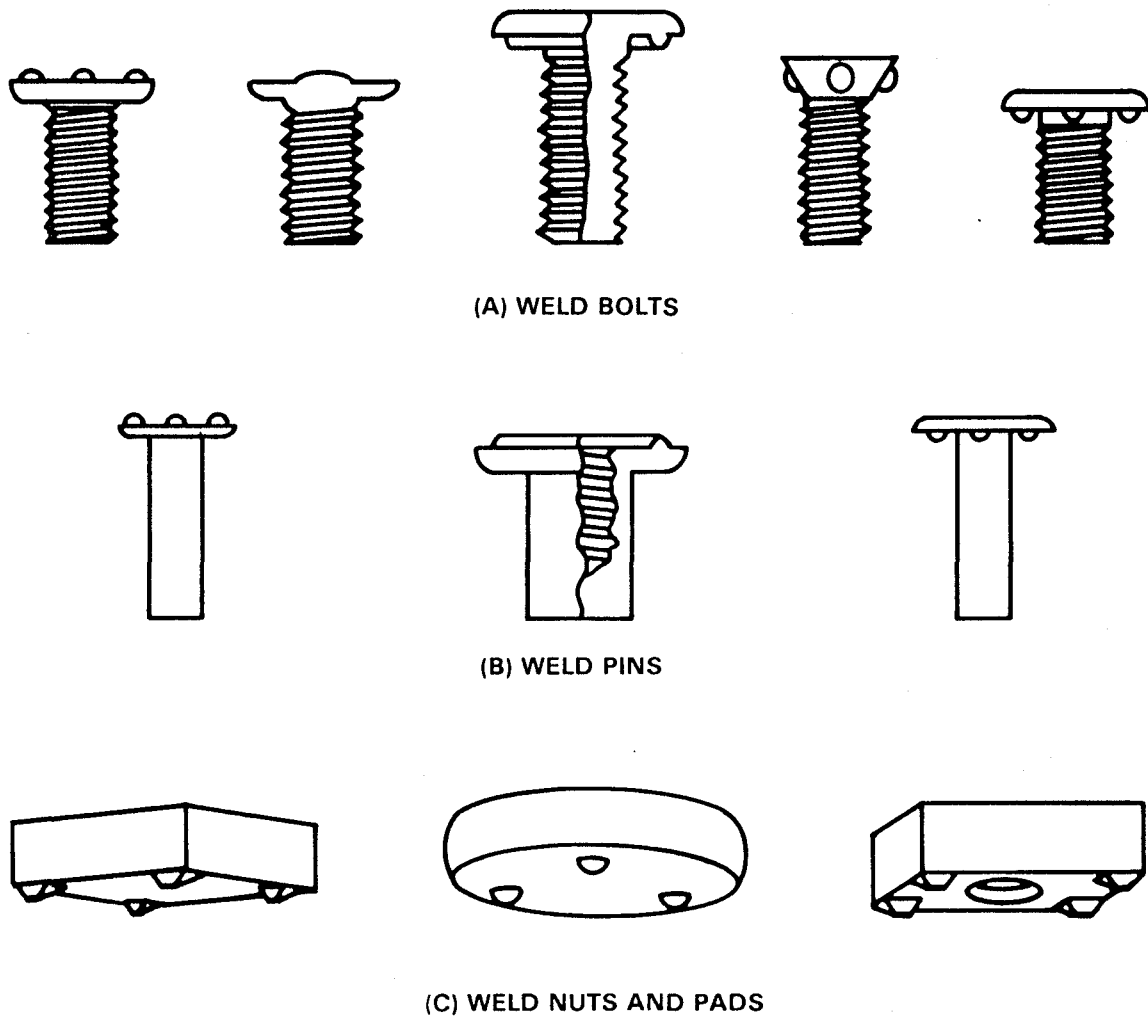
Typical Commercially Available Projection Weld Fasteners
